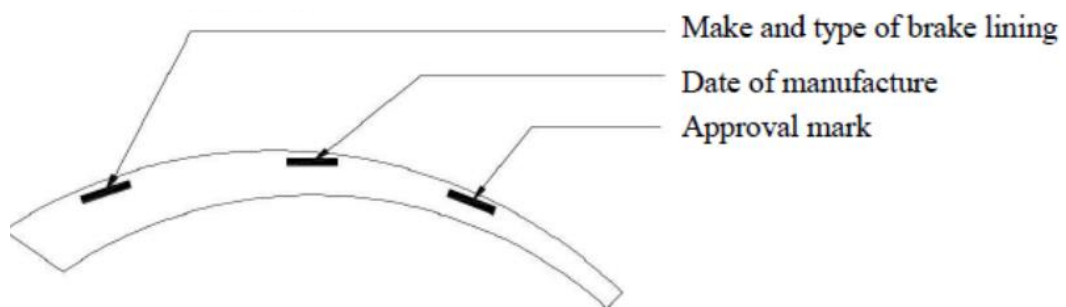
EXAMPLES OF DRUM BRAKE LINING MARKING
